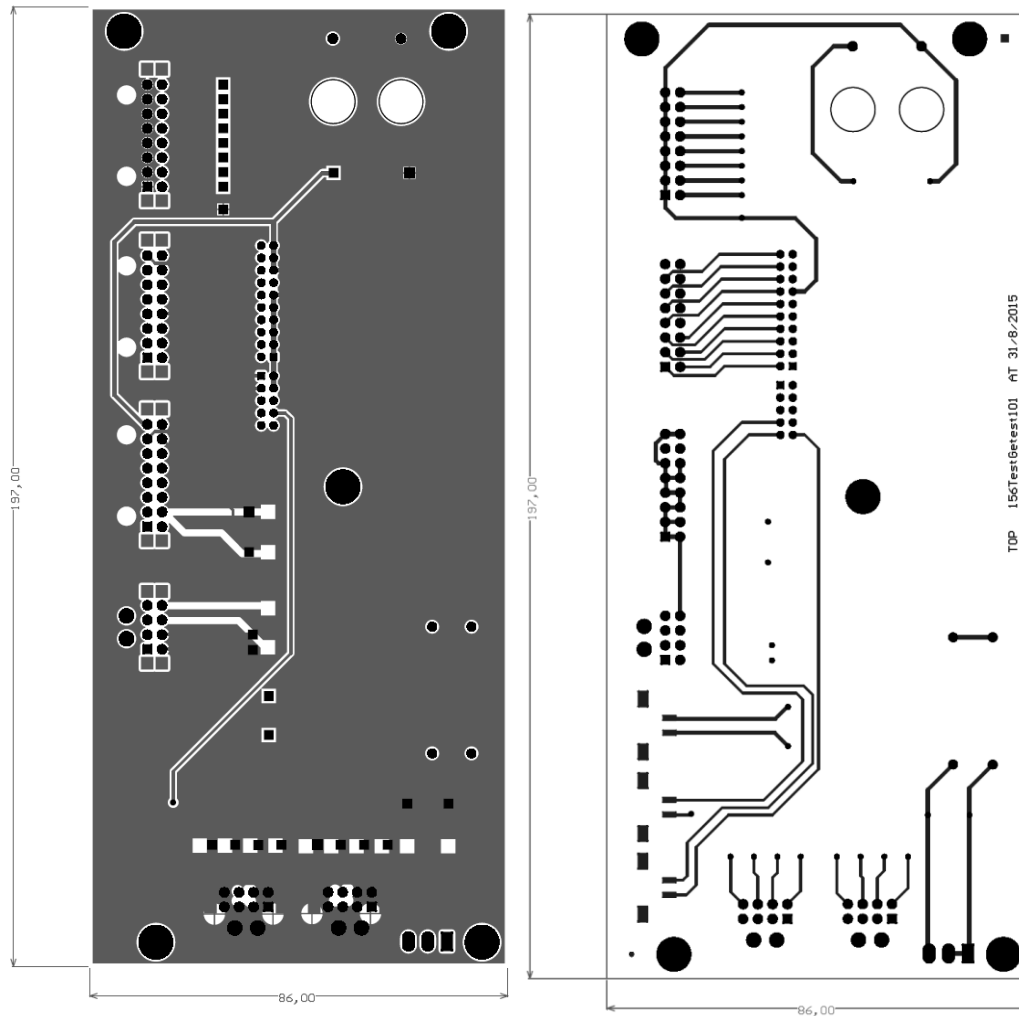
a) Test-Getest bottom layout. b) Test-Getest top layout.
